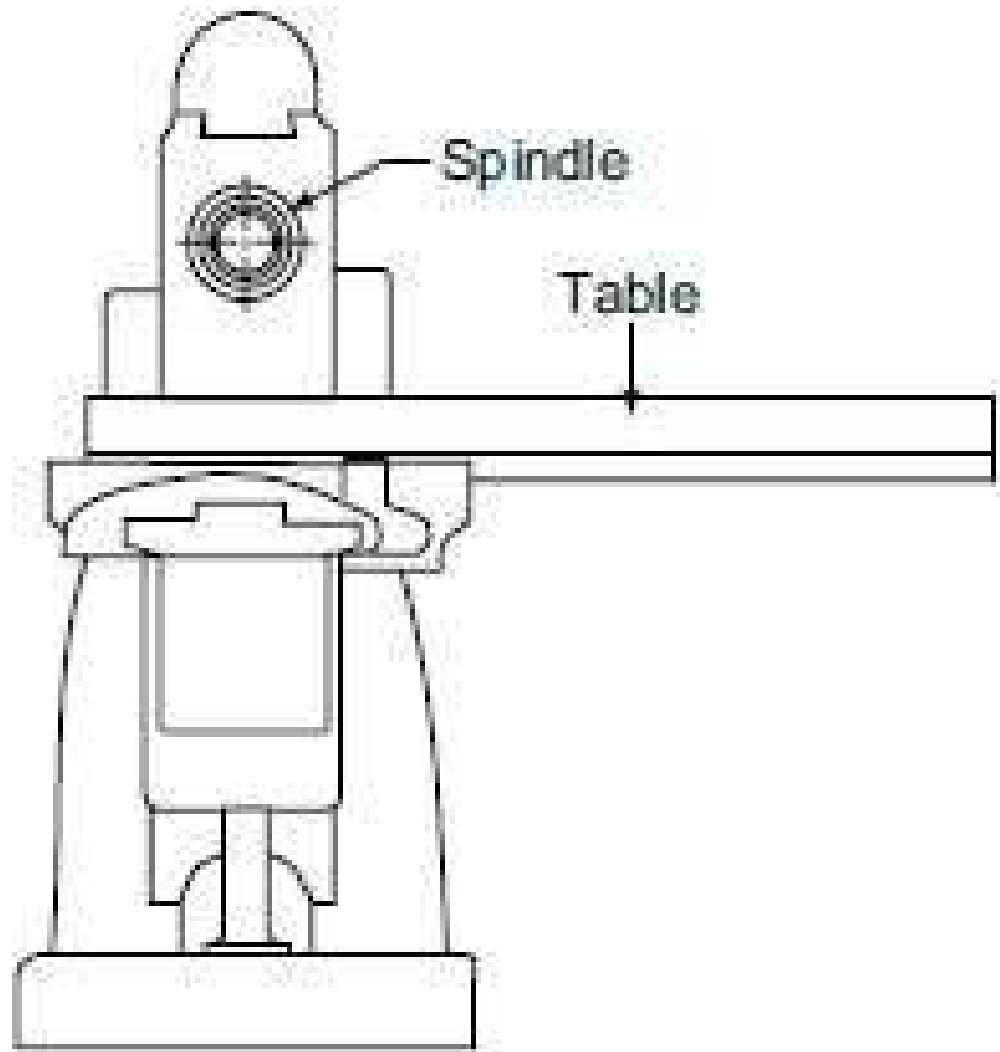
Horizontal Knee and Column Type milling machine
